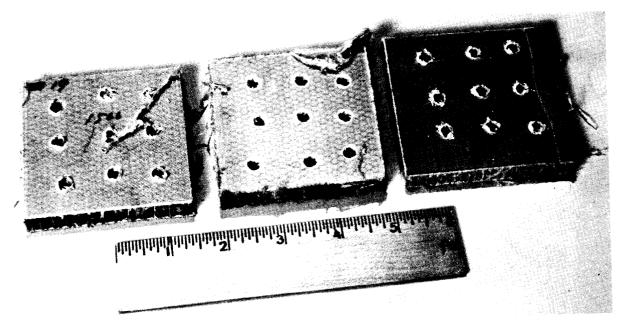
THESE SAMPLES SAME AS PHOTO NO. 5 EXCEPT .250 STANDARD DRILL WAS USED
